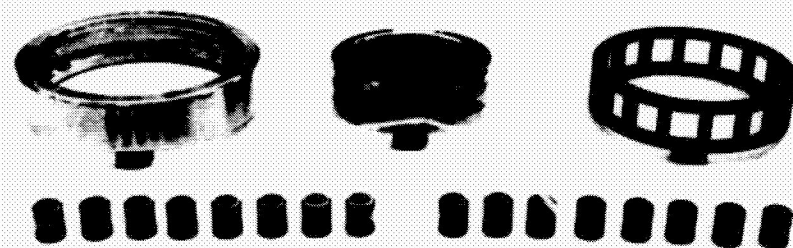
Posttest (Second Segment) Appearance of Loader Roller-Bearing Components Including Experimental PBI-Glass Retainer S/N 880005
